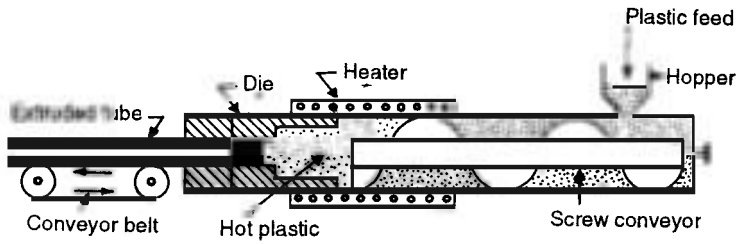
Moulding of Tube by Horizontal Extrusion Moulding
